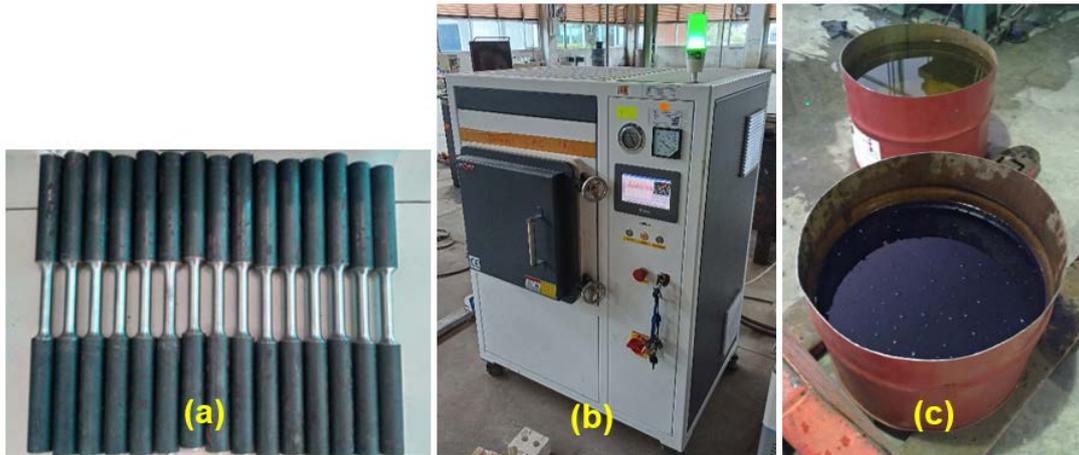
Test specimens and setup equipment: (a) ASTM E8 specimens; (b) electric furnace; (c) quench media
